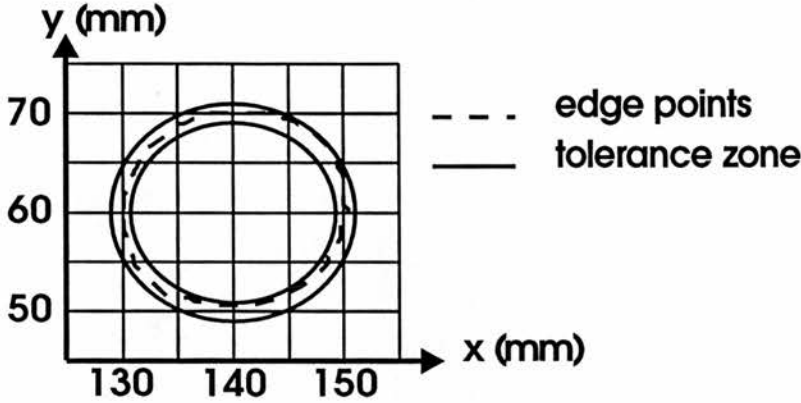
Extracted edge points and tolerance zone in inspection of hole in Figure 4.45. Result of inspection with  $N_{pose} = 9$  and step edge points extracted using 23 pixels.
